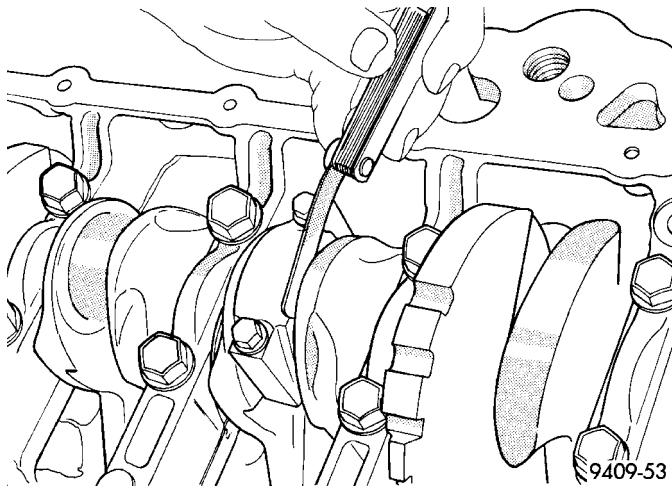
Checking Connecting Rod Side Clearance - Typical
